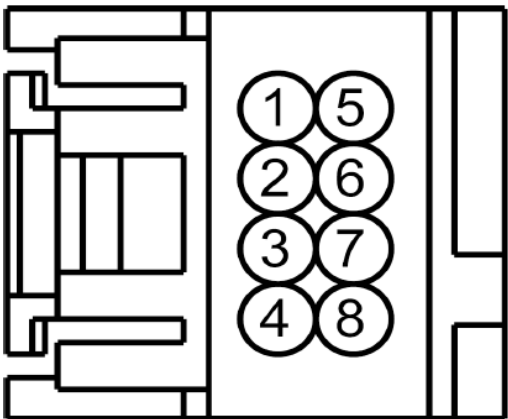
Keypad Switch Assembly Connector End View (C530)
